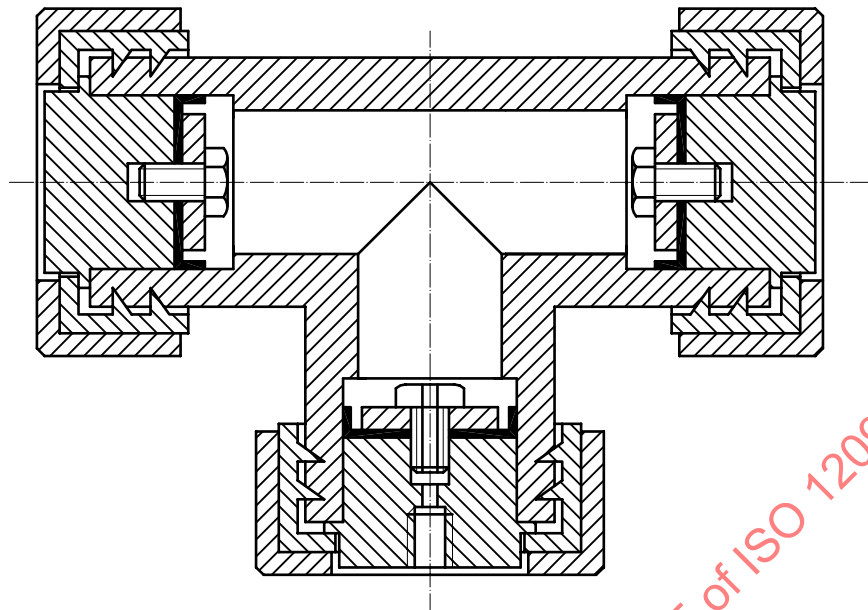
Example of a pressure-tight test piece assembly with mechanical compression joints and with hydrostatic end thrust
